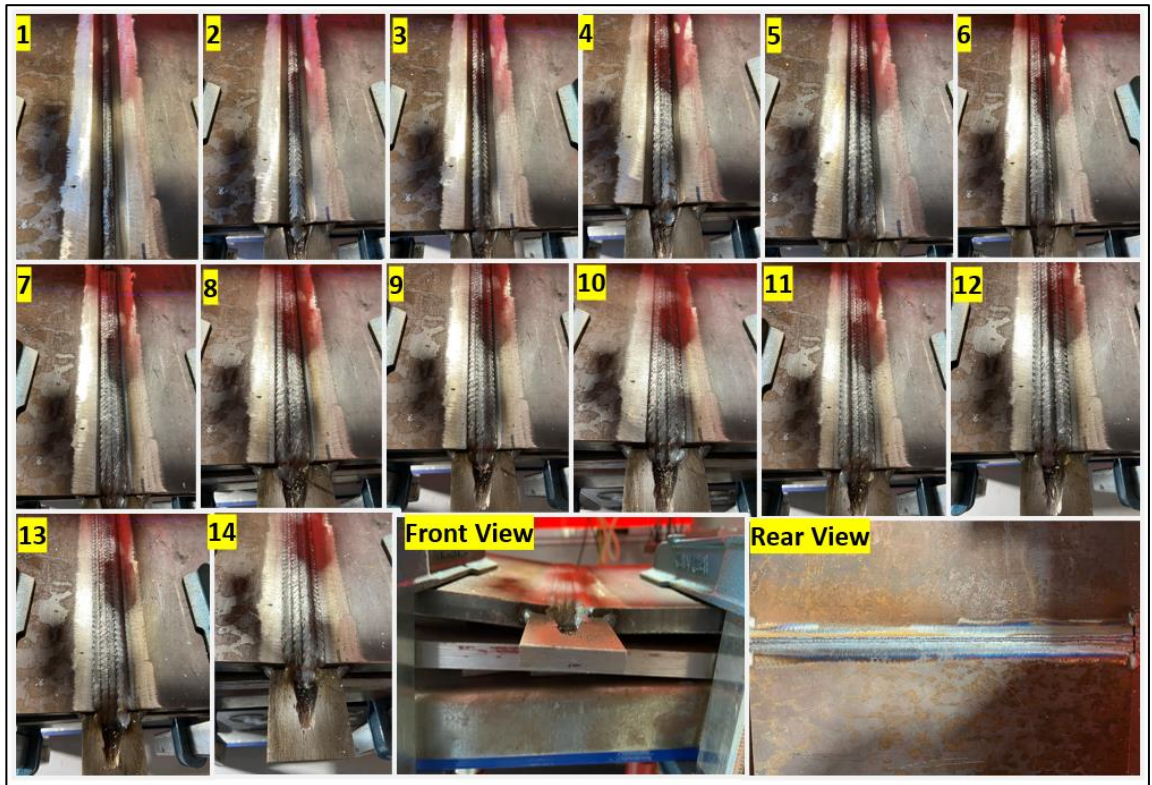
Multi-Pass welding system generated 14 welding passes based on cost function  $C(80\%,5\%,15\%)$  for weld joint 2
